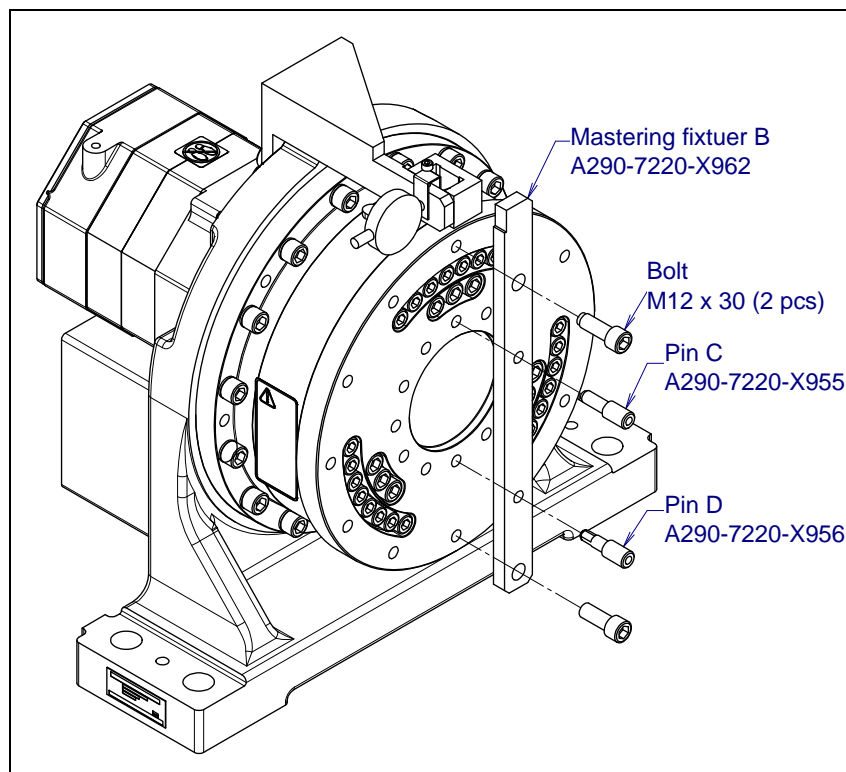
(g) Attaching the mastering fixture to the 1-axis positioner (1000kg/1500kg payload (Compact type))
